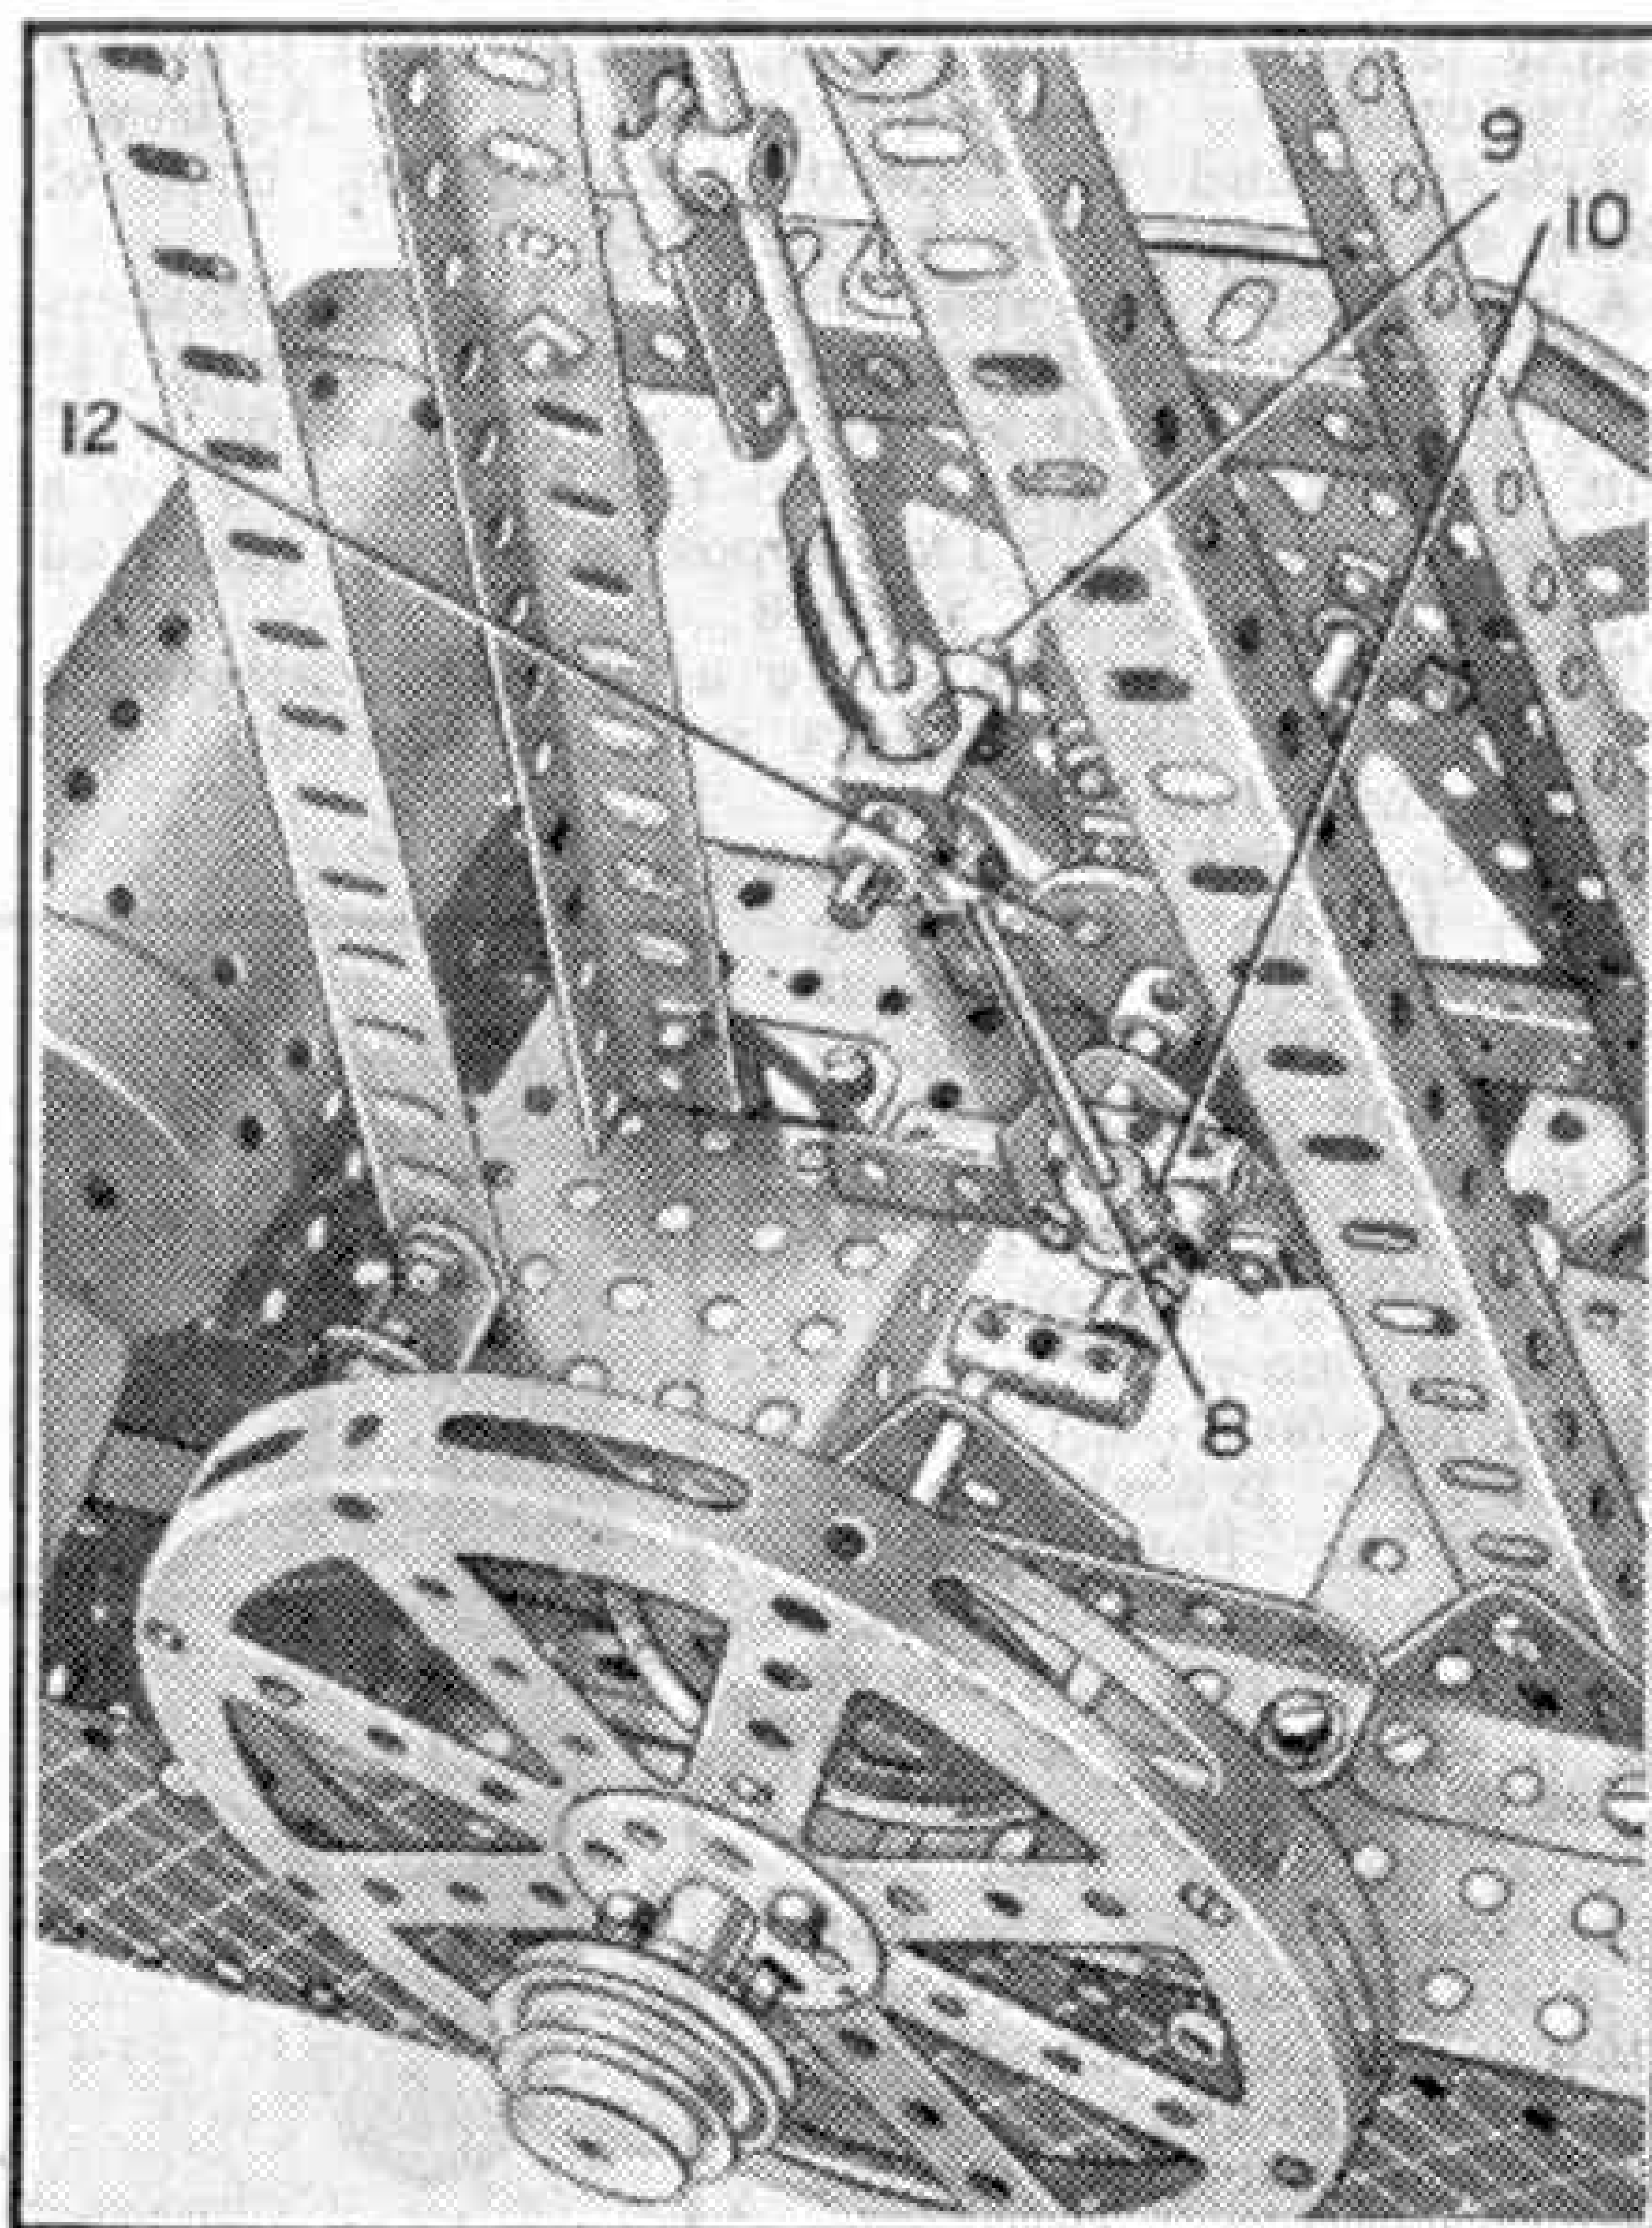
A close-up view of the crankshaft of the vertical steam engine.
